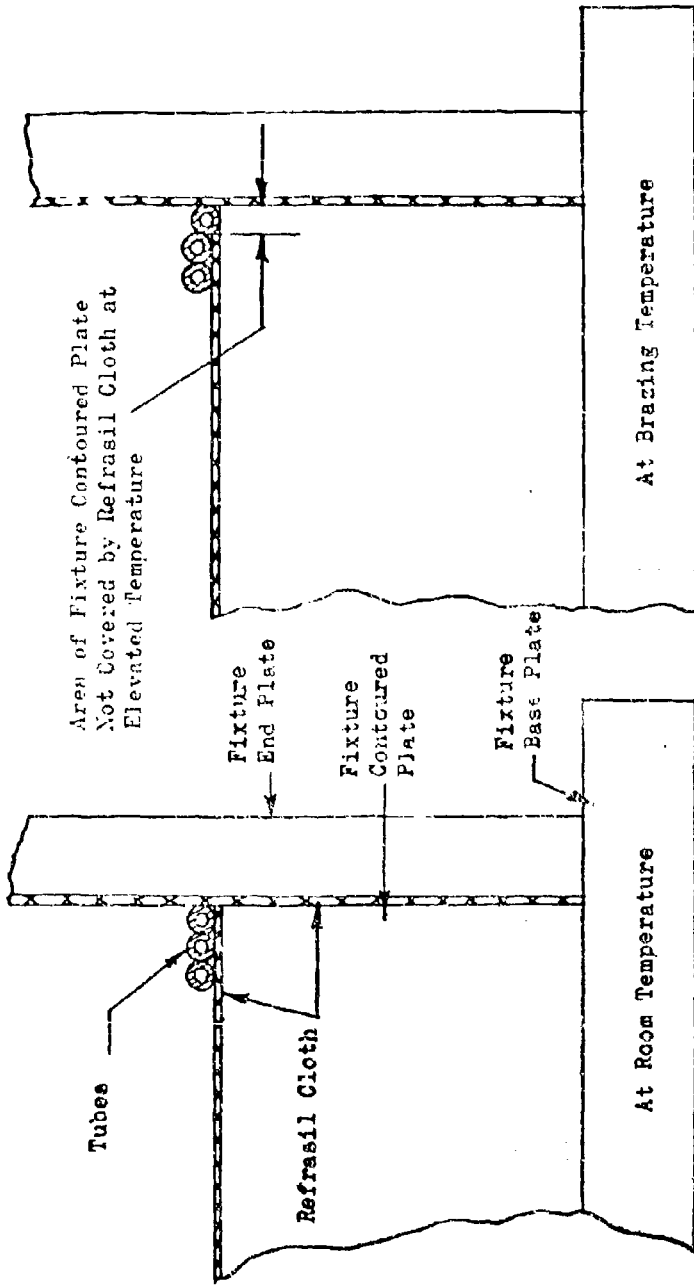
Cross-Sectional Views of Tube Wall and Braze Fixture Taken at Throat Area, Showing Probable Cause of Outboard Tube Lateral Misalignment on Unit No. 1
